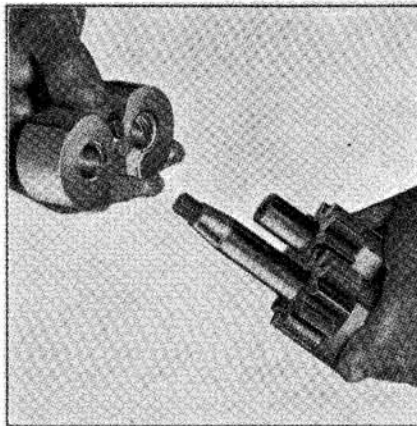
Assembling rear bearing to pump gear shafts. On later pumps, both bearings are alike.
